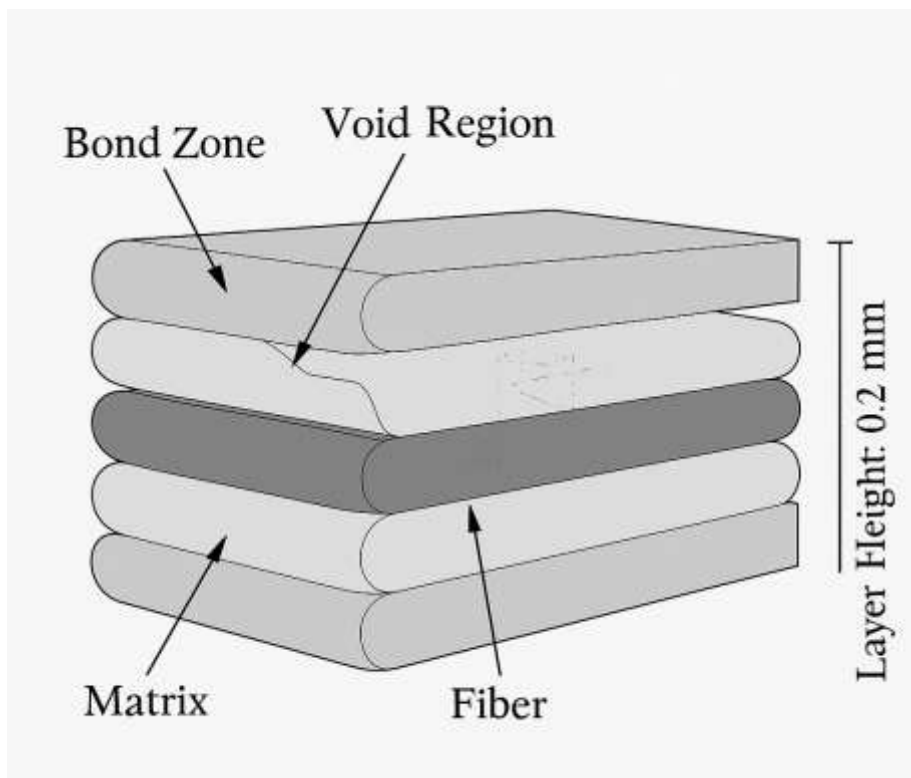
Cross-Sectional Schematic of Printed CFRTPC Layers
